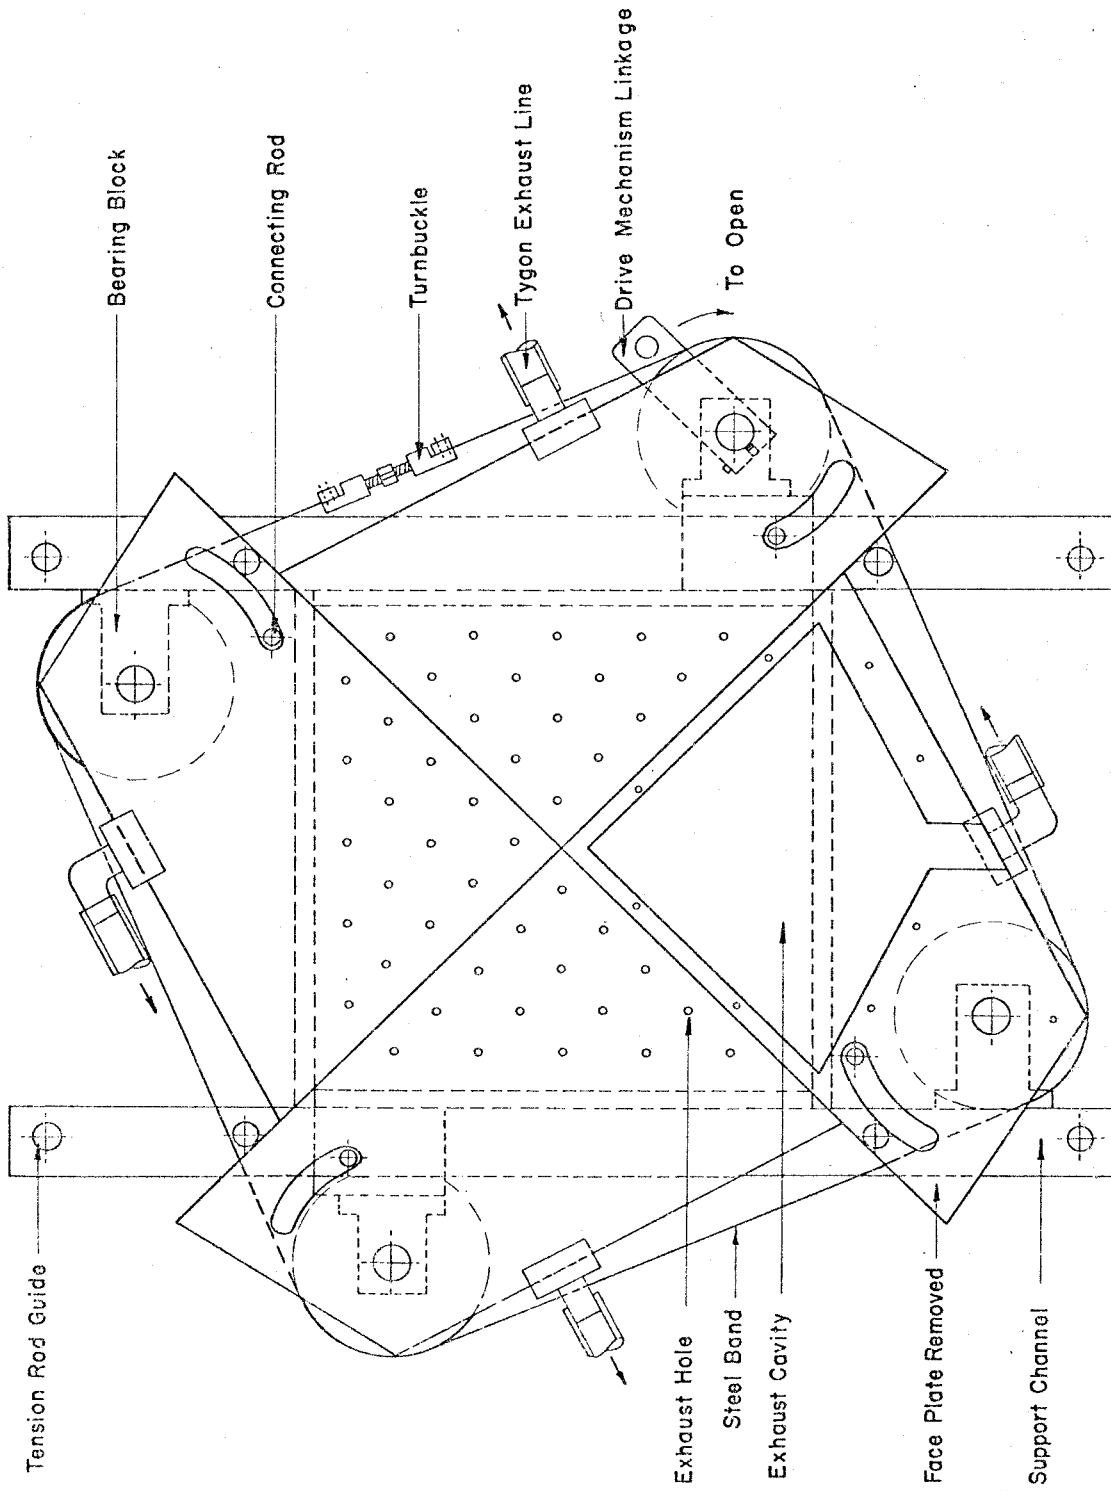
SCHEMATIC OF SHUTTER ASSEMBLY (FACE PLATE OF BOTTOM SHUTTER BLADE REMOVED)
